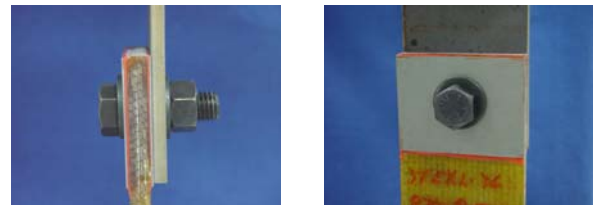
The 3D composite/steel lap shear joint assembly with adhesively bonded steel plates.
